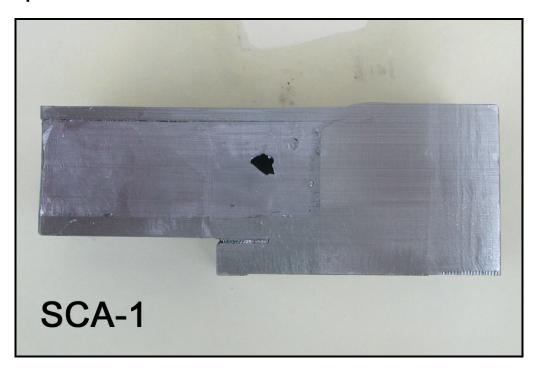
SCA-1 (#21) Lower Section Cut
